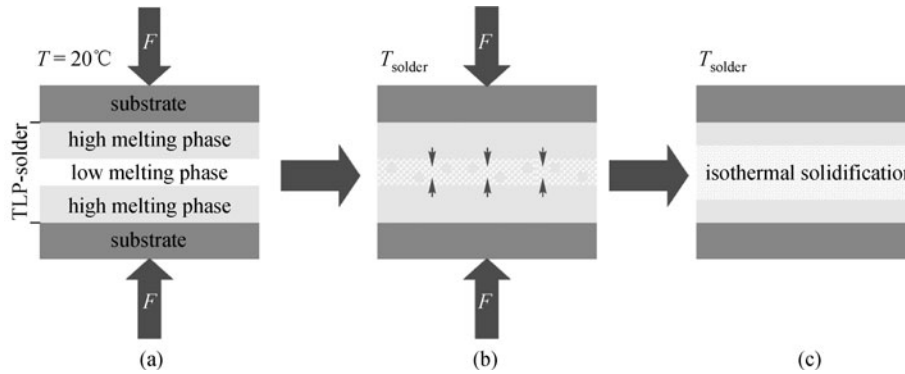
Transient liquid phase process. (a) Initial solder composition; (b) solder at soldering temperature, diffusion of high-melting elements to liquid phase; (c) soldered joint after isothermal solidification
